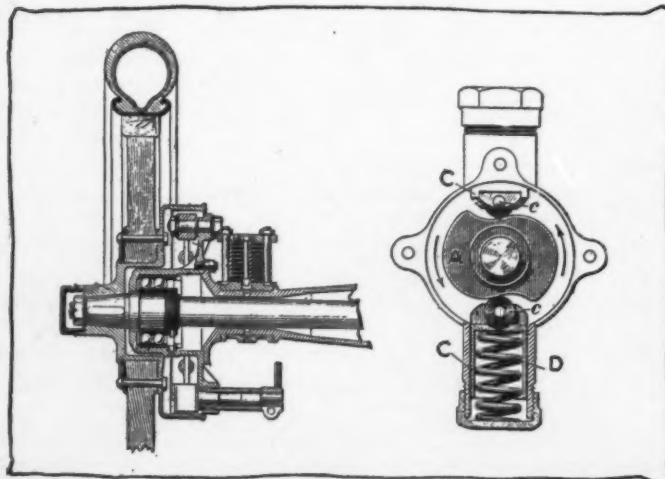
French wheel drive. Fig. 10—Ballet's spring device
